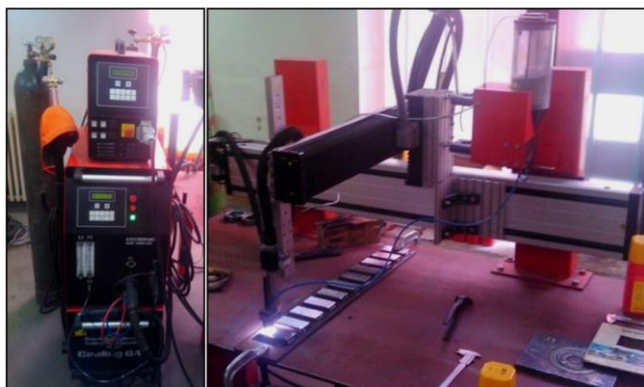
PTA welding device with numerical control unit, /3, 23/.
